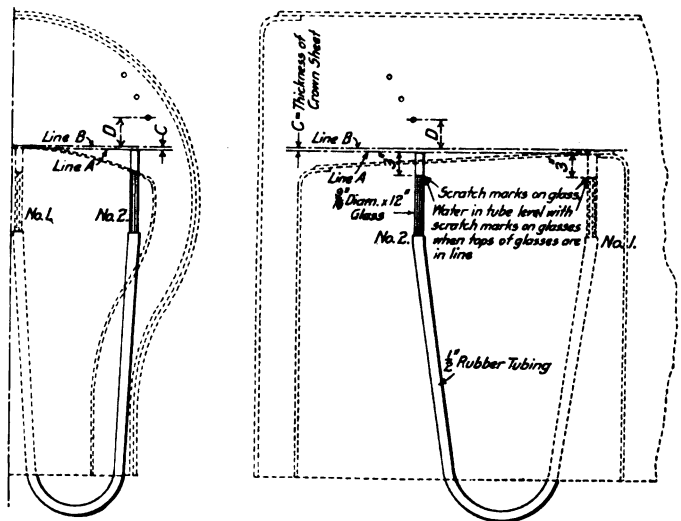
Simple and Accurate Method of Locating Gage Cocks.
